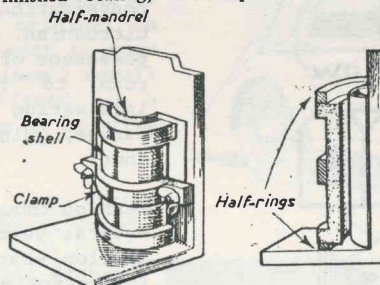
A simple pouring jig made from an angle-plate sheet, iron mandrel and clamp. The sectional sketch shows the use of the half-rings if the bearing metal is to be built up over the edges of the bearing.
